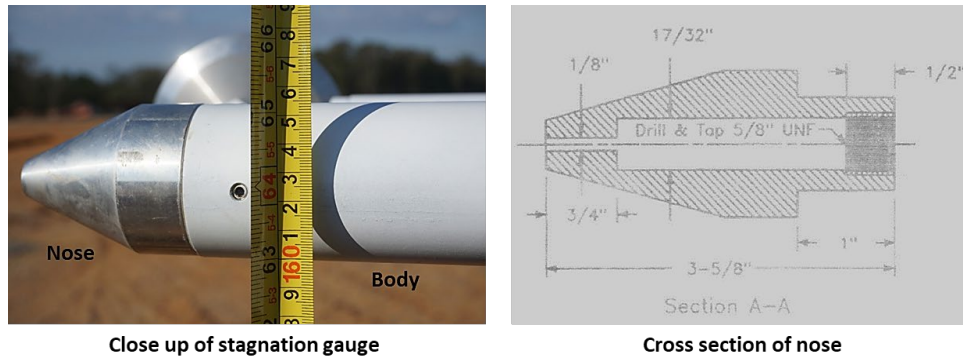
Example of a stagnation gauge (photograph and cross-section engineering drawing courtesy of the US Army Corps of Engineers, Engineer Research and Development Center)
